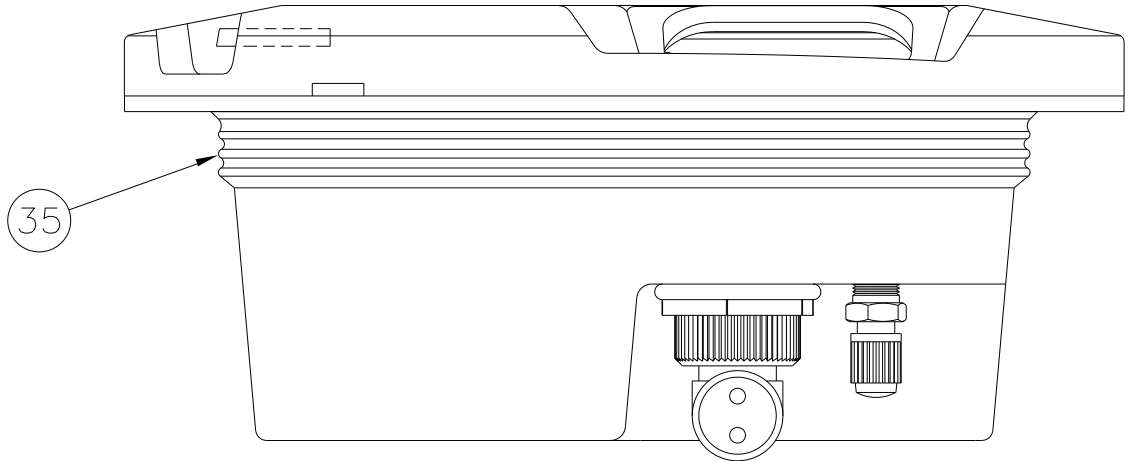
Side view of Fixture with Optional External Support Ring Gasket
